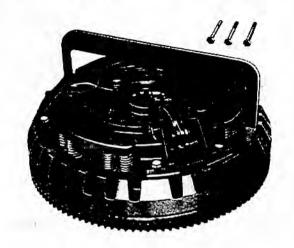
RELEASE LEVER HEIGHT SETTING GAUGE
